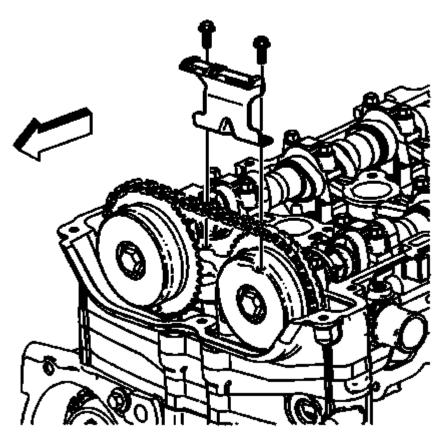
View Of Engine Front Cover Courtesy of GENERAL MOTORS CORP.
